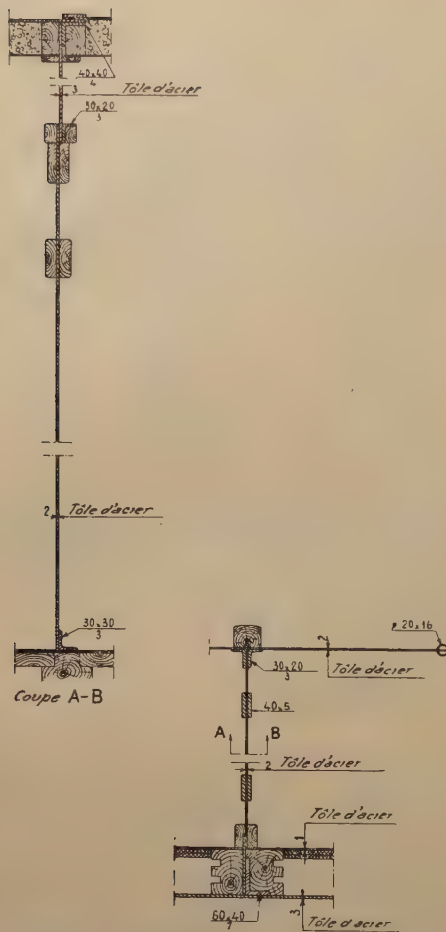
Italian State Railways. — 3rd class metal carriages rebuilt on the underframe of wood-bodied carriages. Horizontal and vertical sections of cross partitions.
